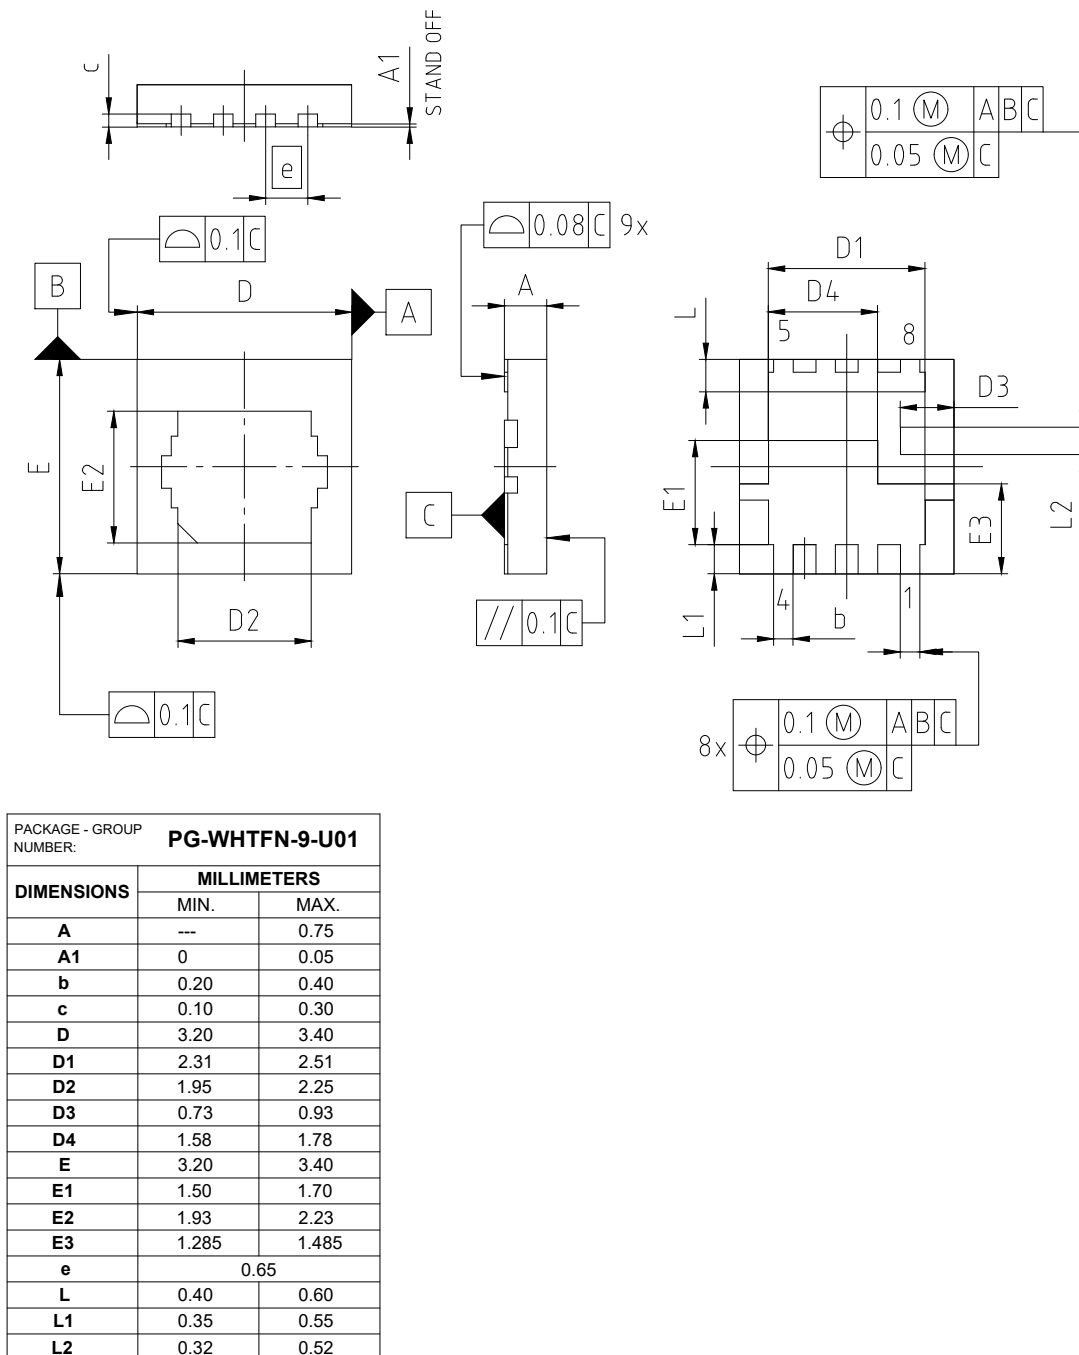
Outline PG-WHTFN-9, dimensions in mm
